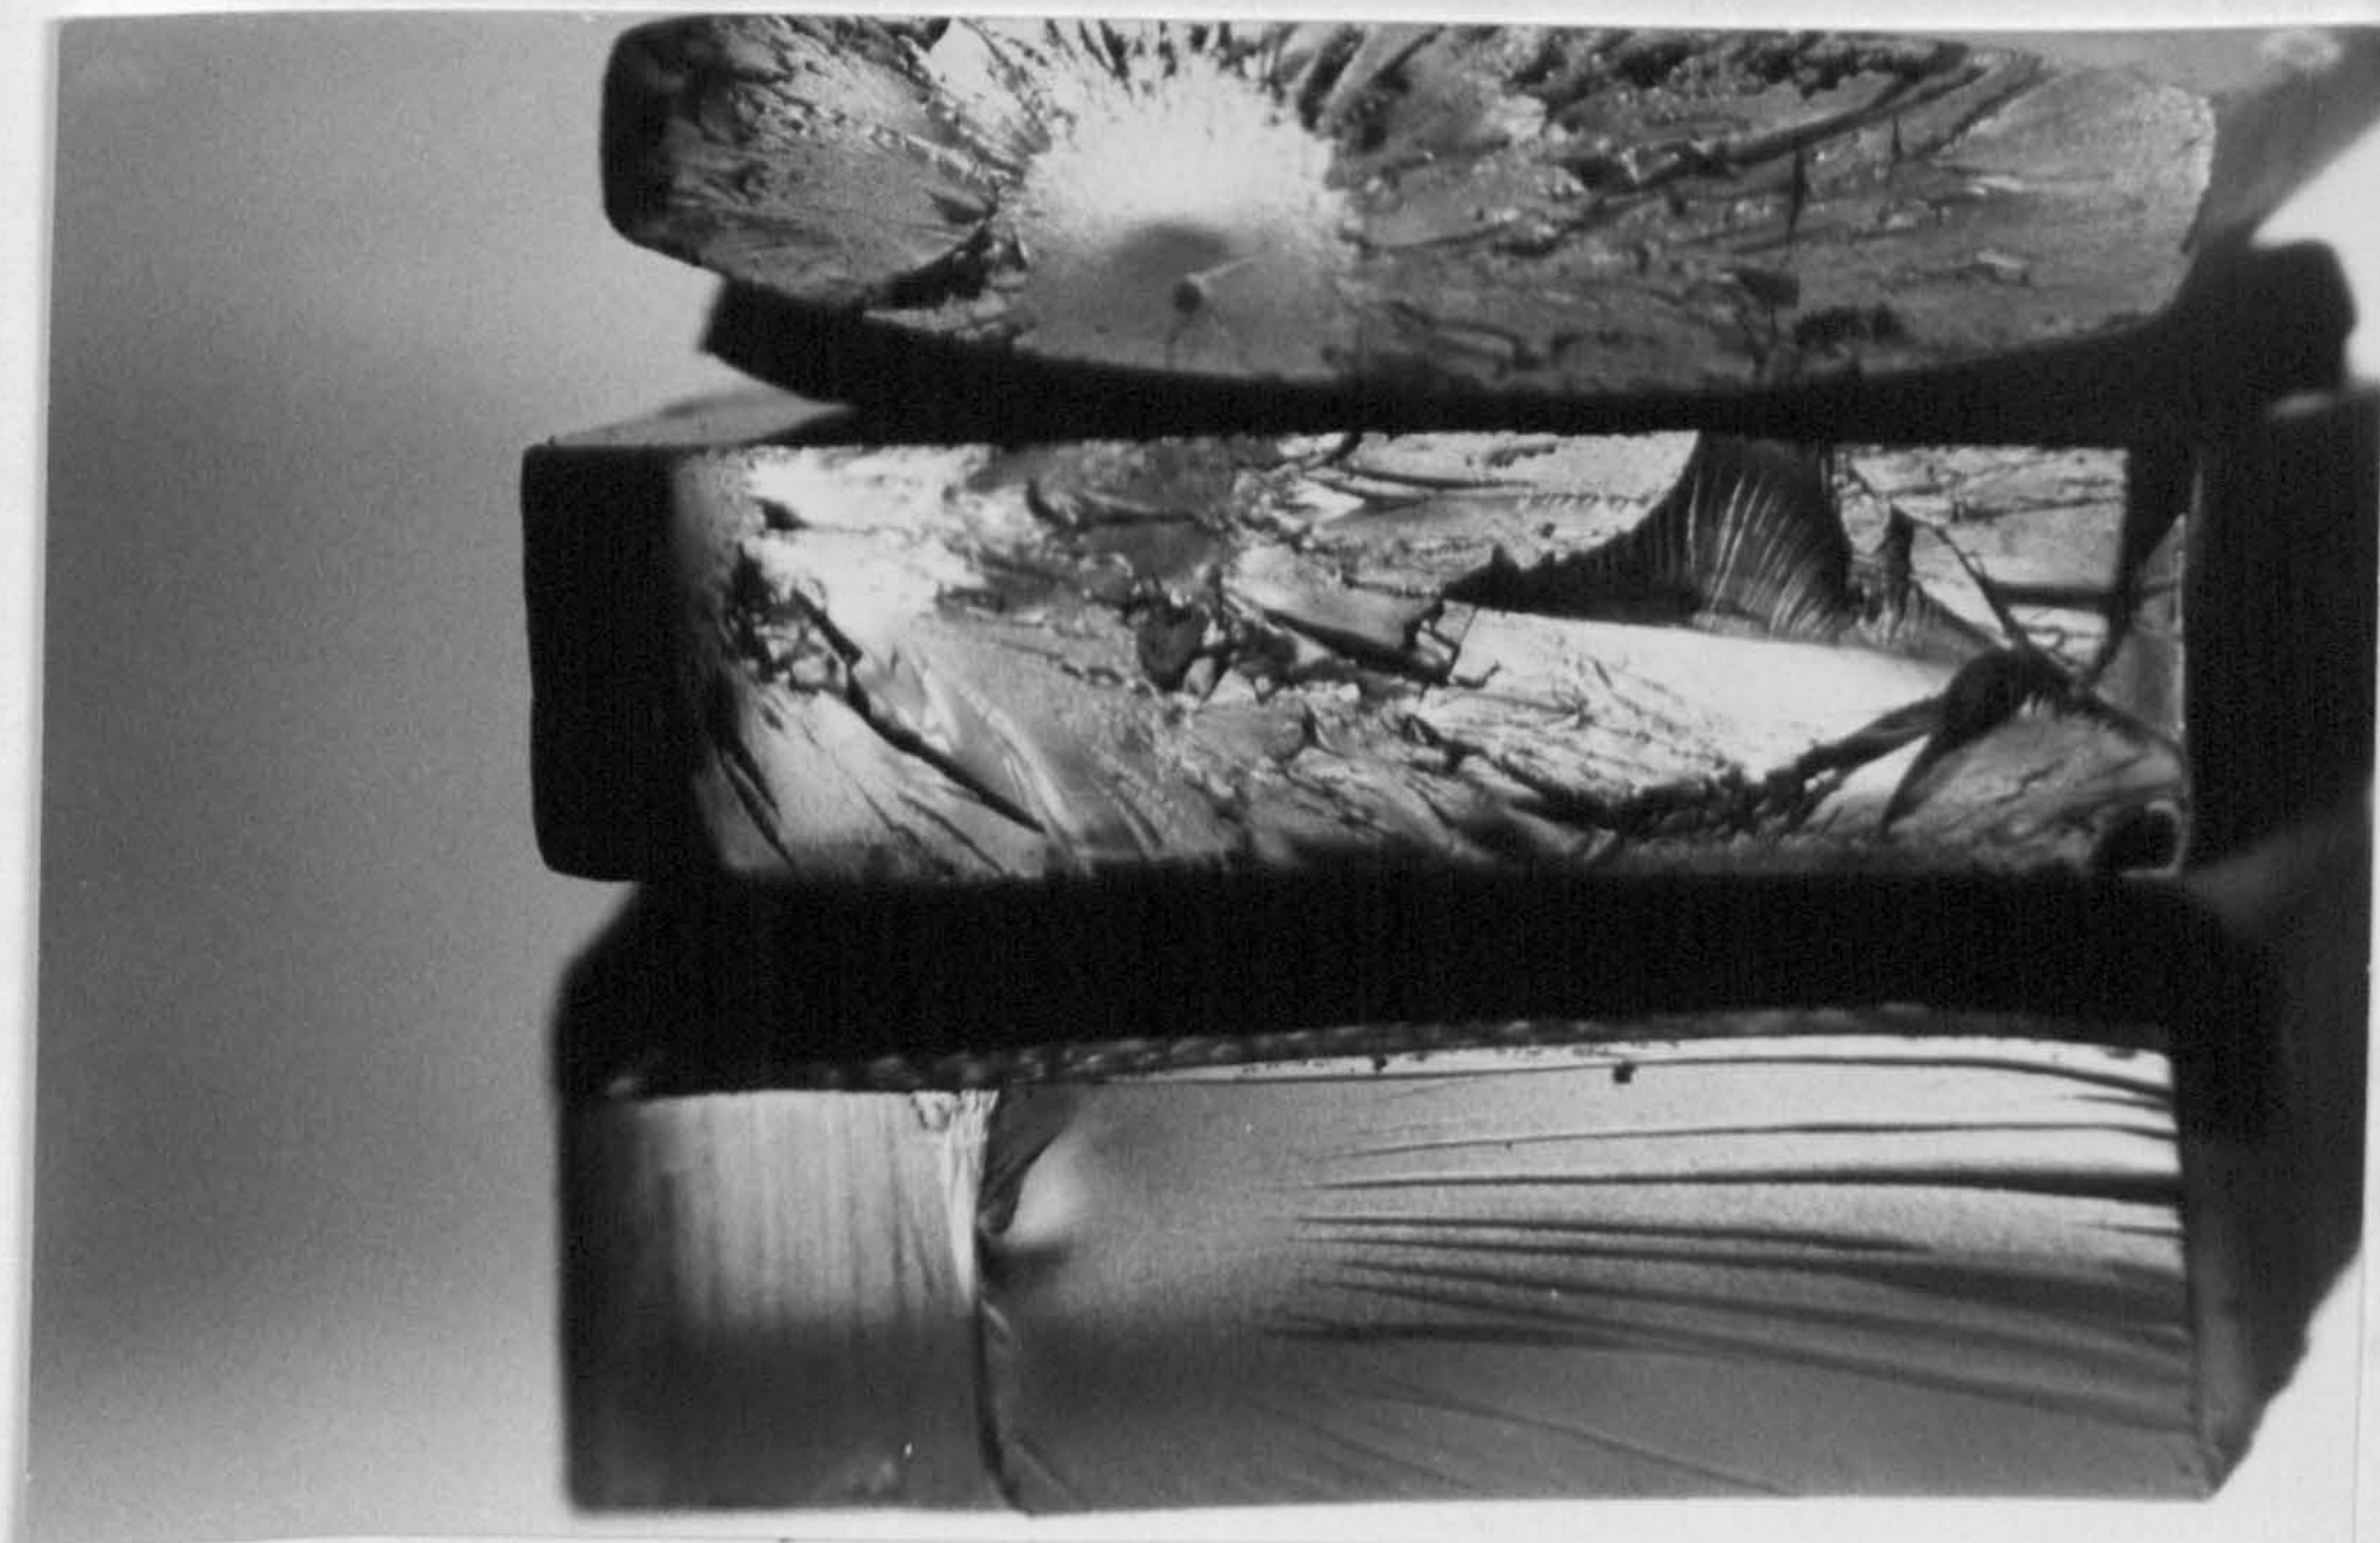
Fracture surfaces of three C_I7 specimens
